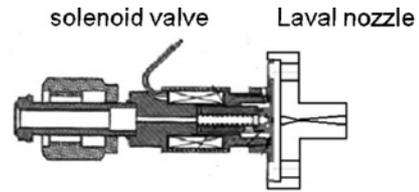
Helium gas injector. Solenoid valve is directly coupled onto Laval nozzle.
